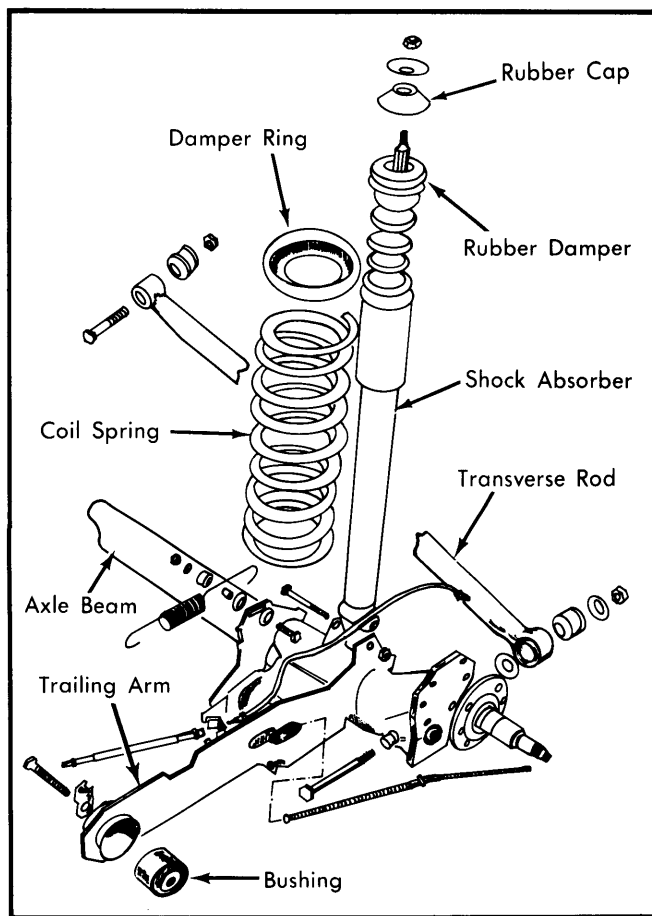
Exploded View of Audi 5000 Rear Suspension
